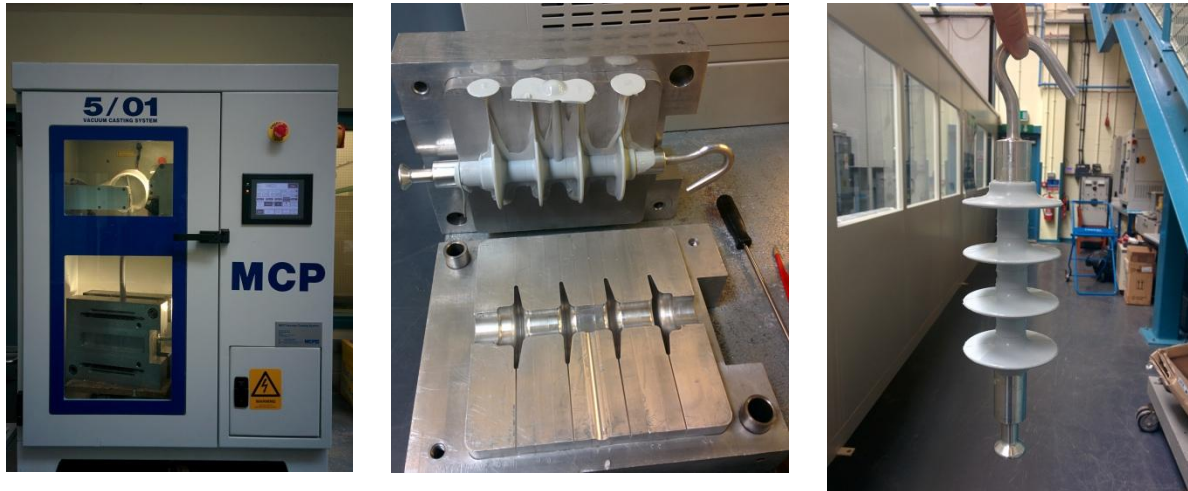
a) vacuum casting injection, b) full conventional insulator metal mould, c) full insulator manufactured
